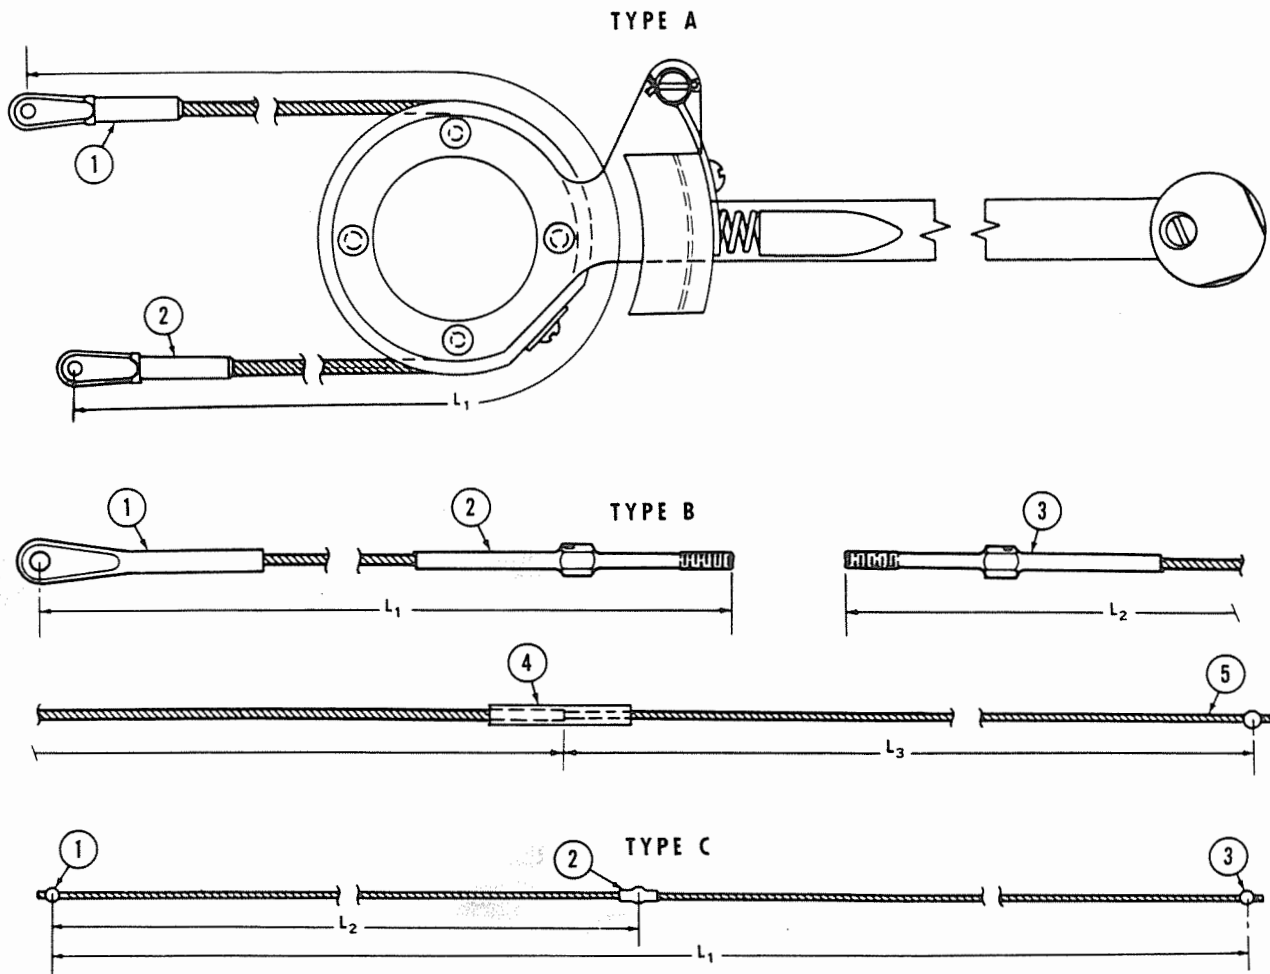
(Sheet 8 of 8 Sheets). Propeller Pitch Control System – Cable Assemblies
